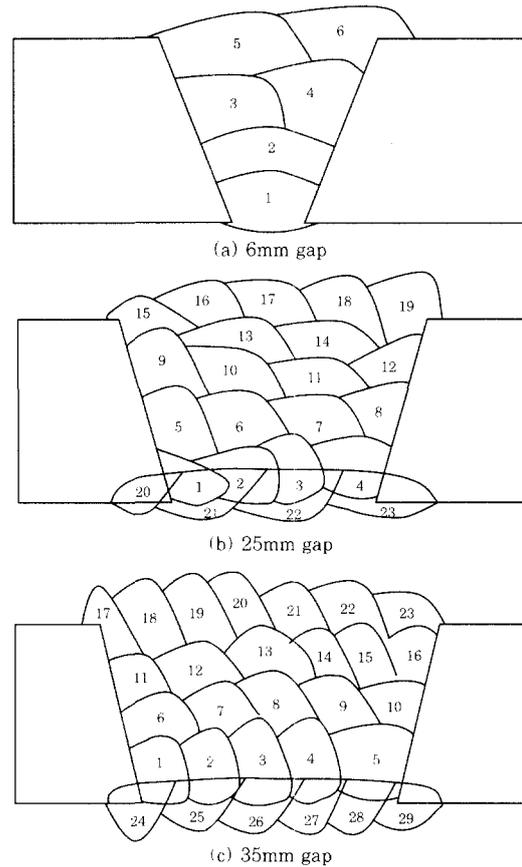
Shapes of cross sections and welding process in weld specimen
